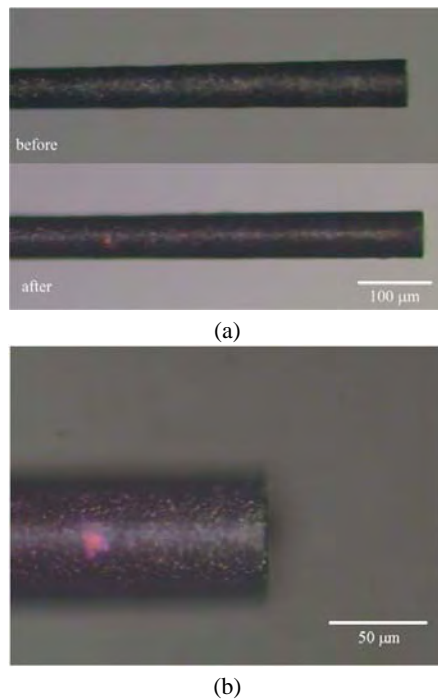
Insulated tool electrode: (a) before and after insulation, (b) enlarged view
